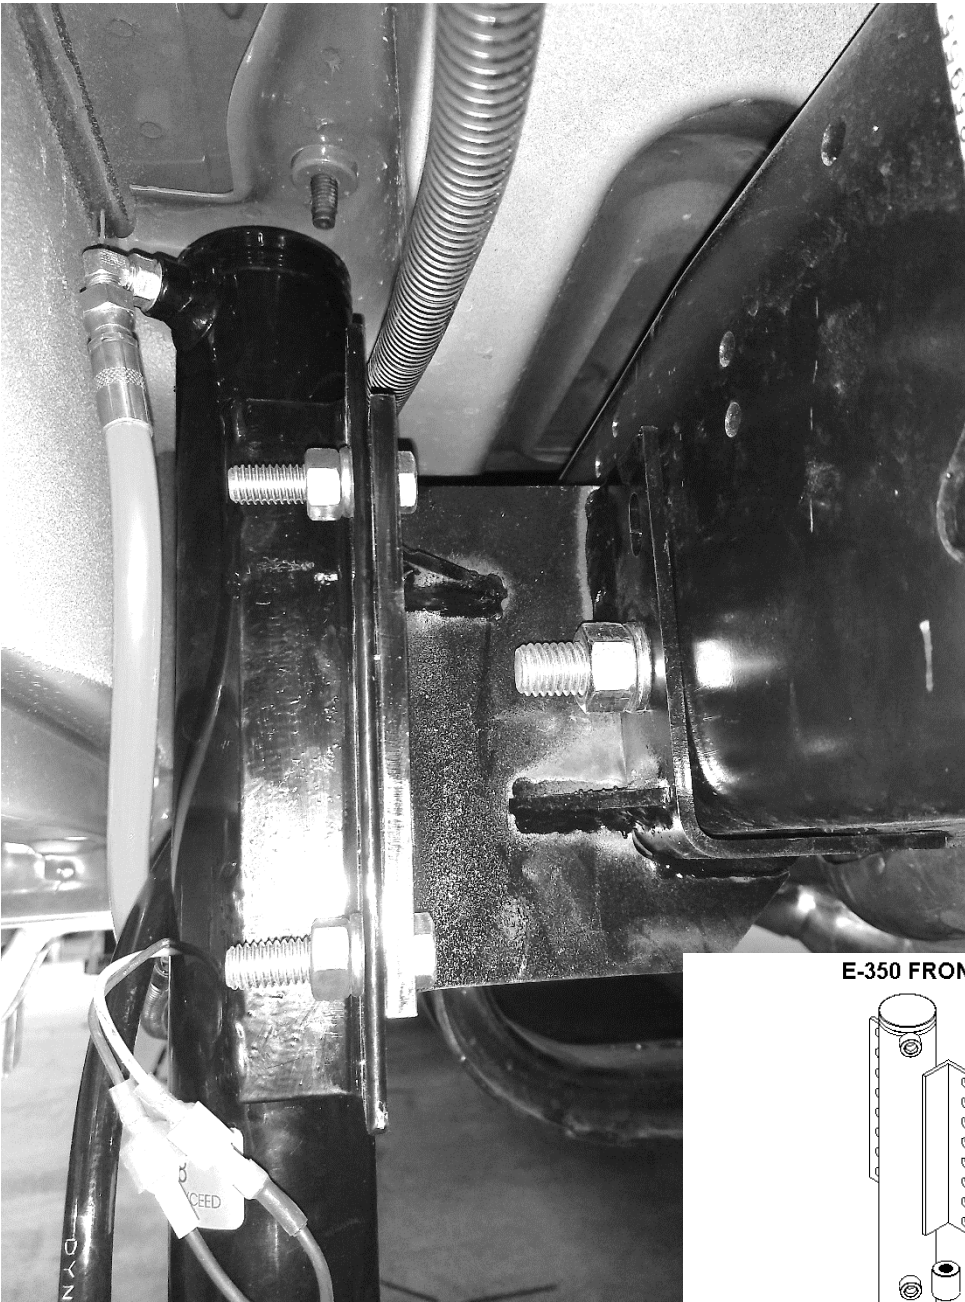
Passenger front mounting bracket shown fastened with 3/8" hardware (perspective facing front of vehicle).
